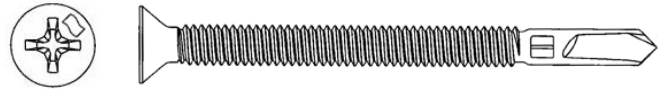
#12-24 PHILLIPS FLAT HEAD TYPE 12 SCREW
